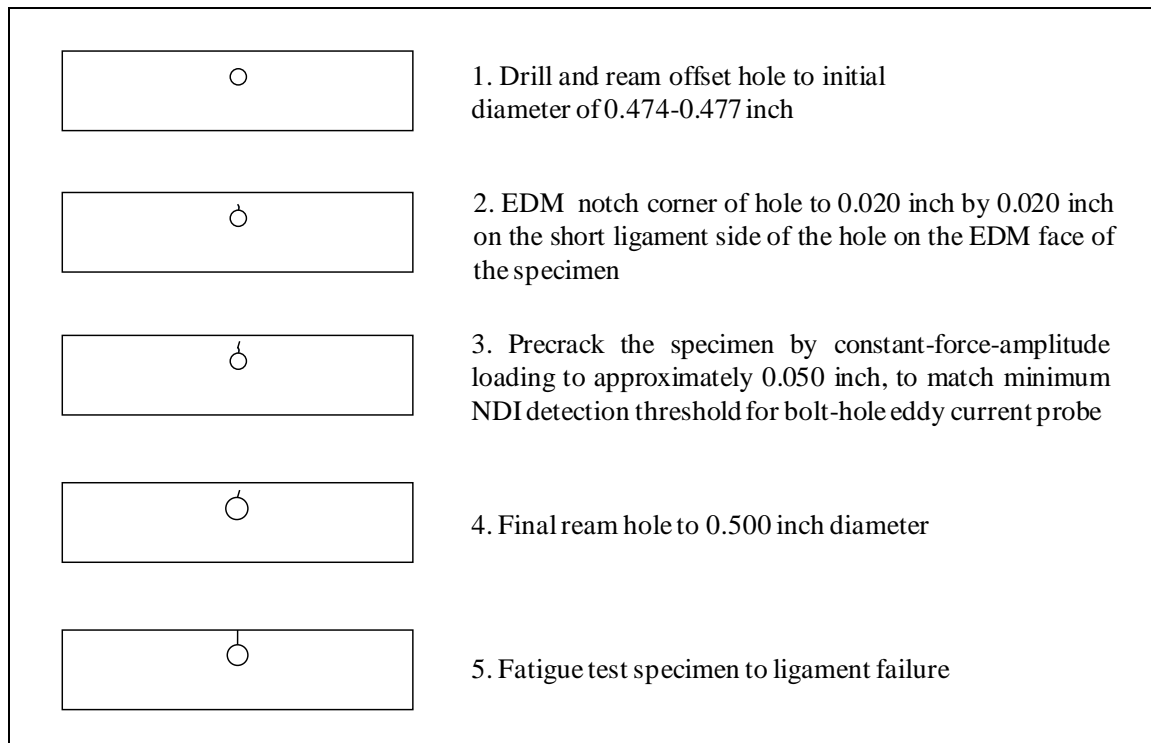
Manufacturing drawing of ASTM E 647 specimens
